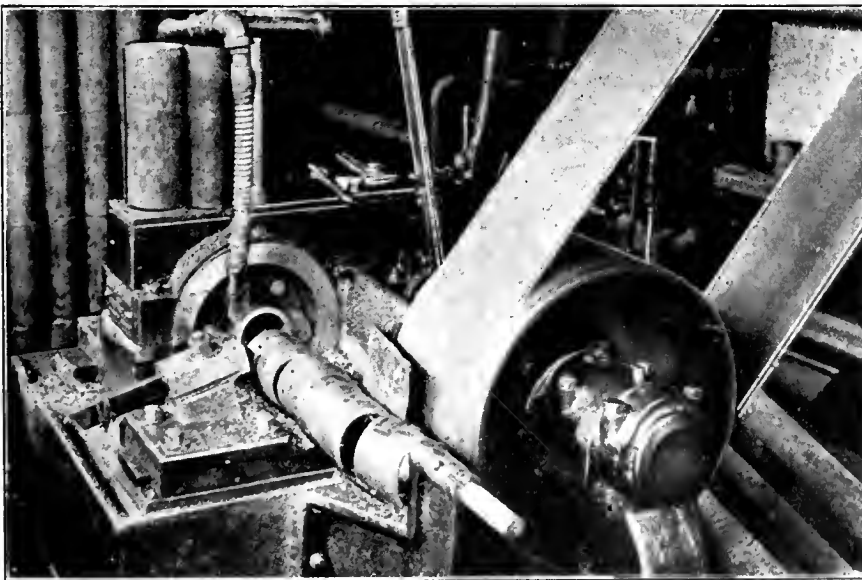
"HAMILTON" CUTTING-OFF MACHINE.
